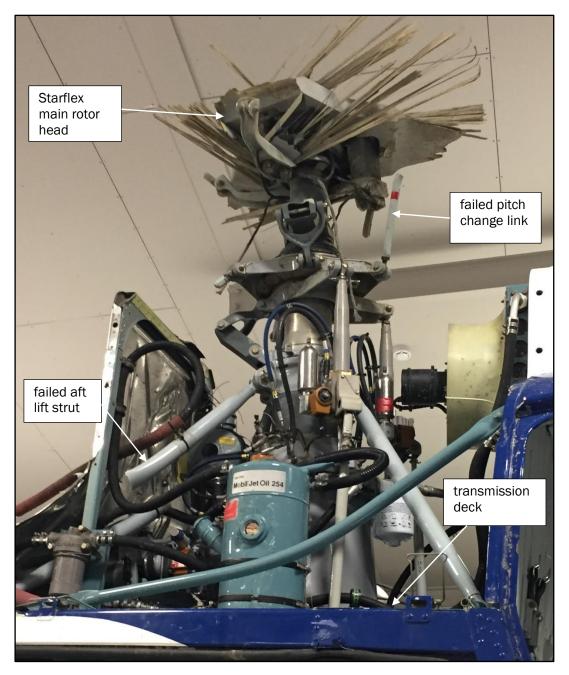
Main rotor gearbox with main rotor head damage due to rotation under high power
